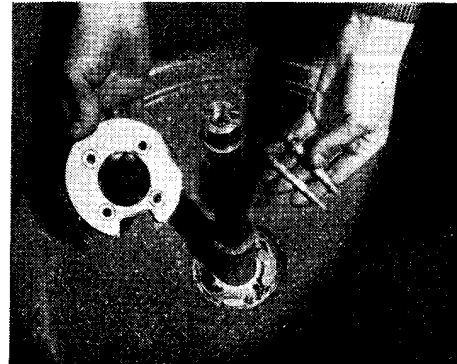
Removing the tub locking ring. Note the slotted milled brass drive bush at top of agitator shaft
